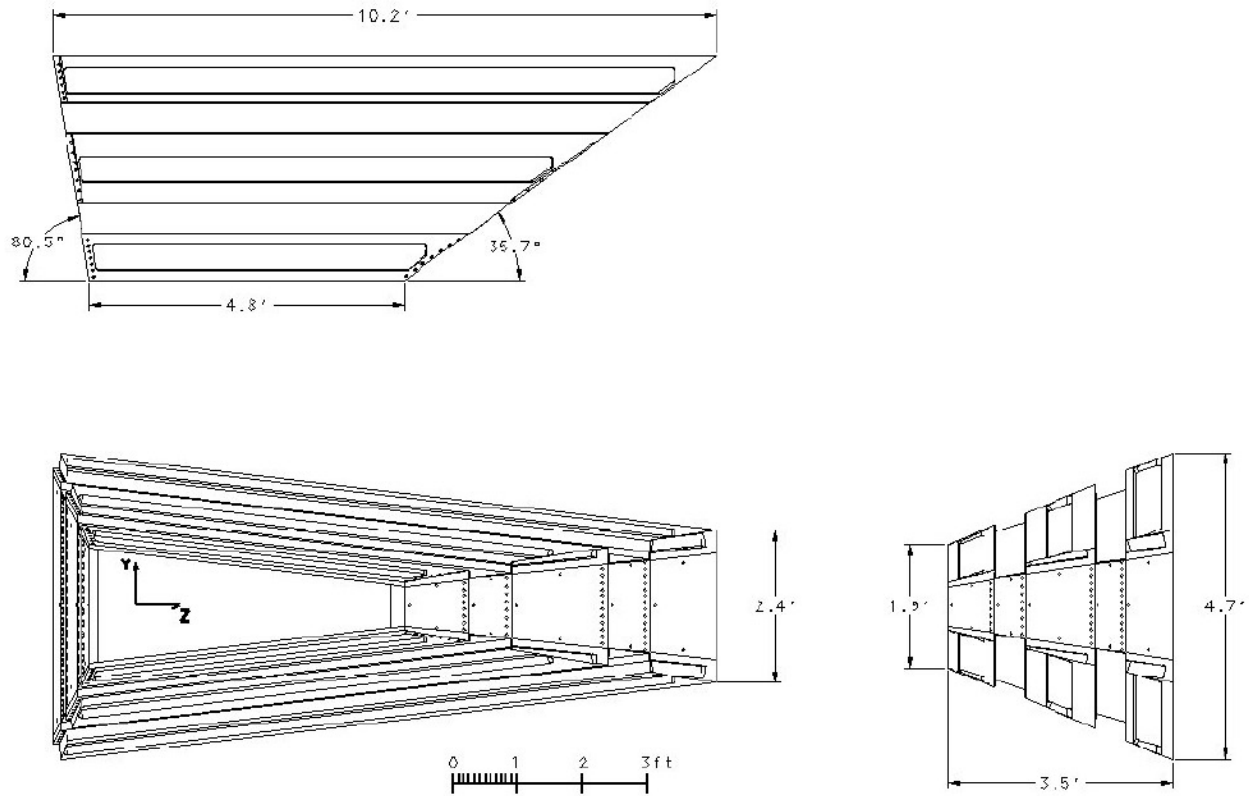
Top, bottom, and side views of the assembled drift chamber for a sector giving overall dimensions.
